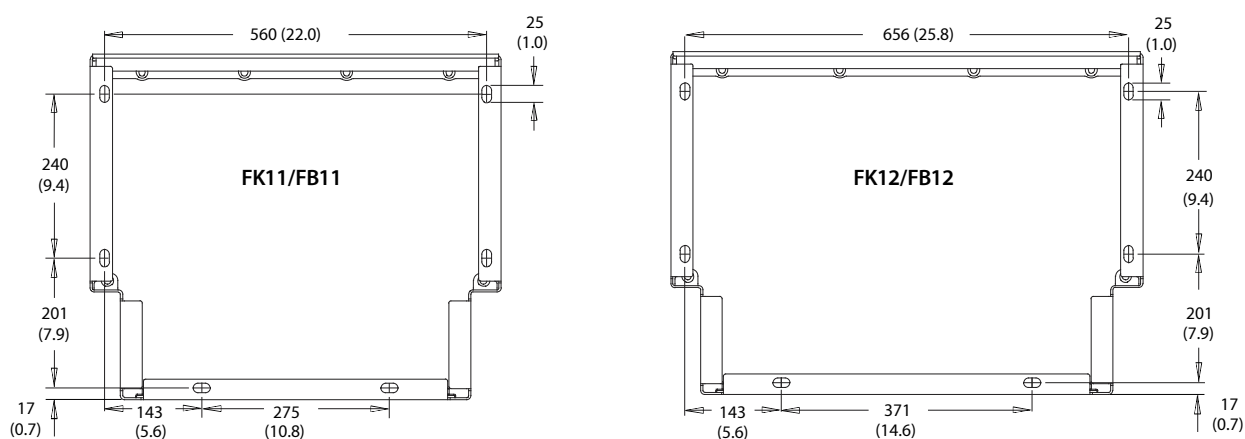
Dimensions for Pedestal Mounting Holes (FK11/FK12 Frames)
